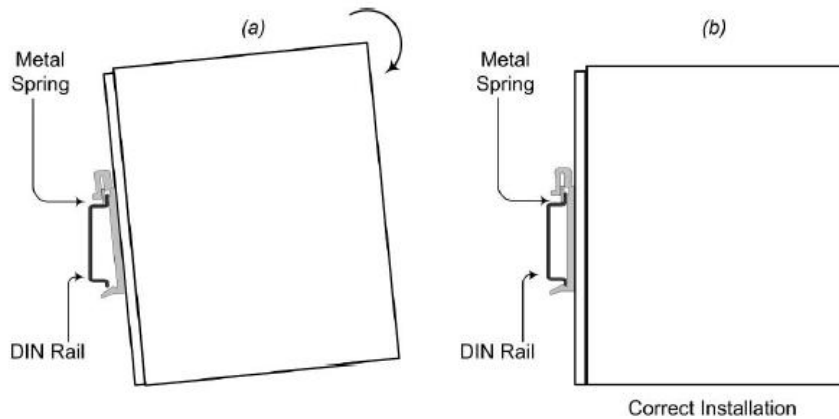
Industrial PoE Switch Mounting to DIN Rail
